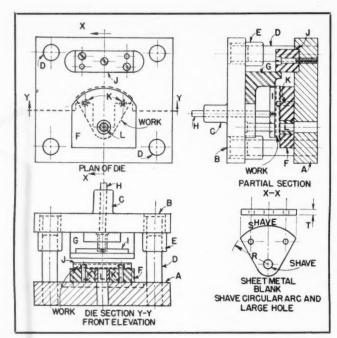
Illustration of a simple die for shaving a circular arc edge and one hole in a medium sized sheet metal blank.
